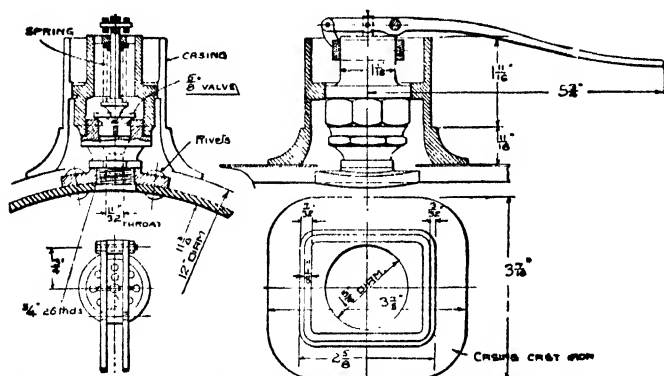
Safety Valve for Model 2-in.-Scale G.N.R. Locomotive.
